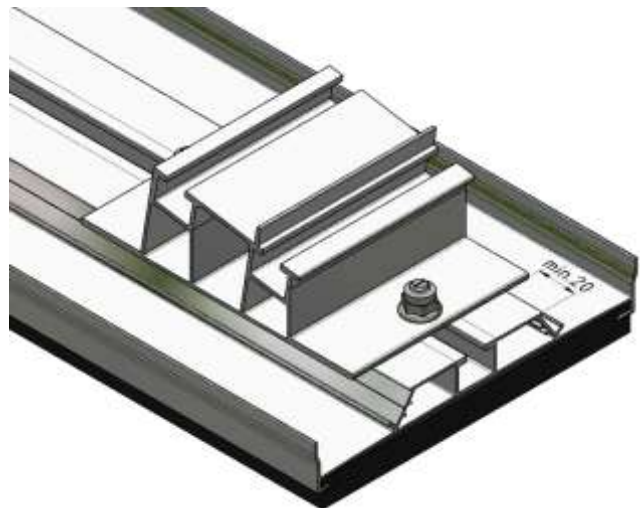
Bottom support G3.1 mounted with both T-Head screws
